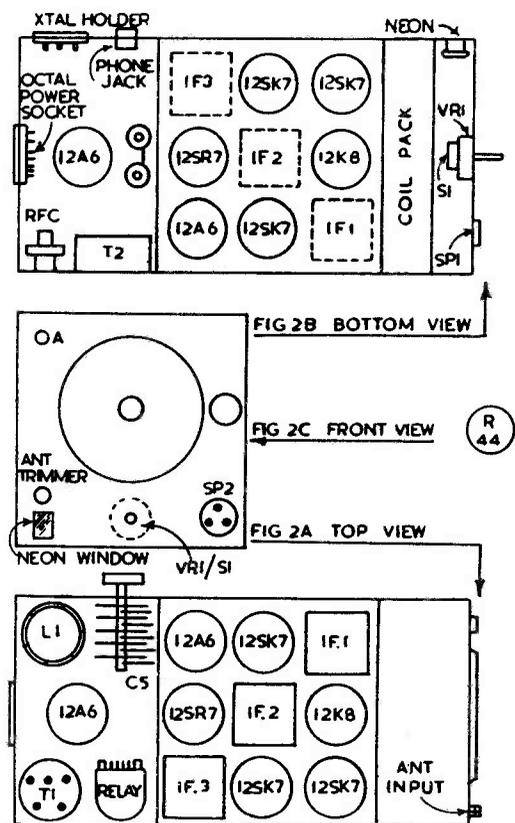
Front, top and bottom view of the BC-455 showing main components and additional parts for carrying out the modifications suggested.
